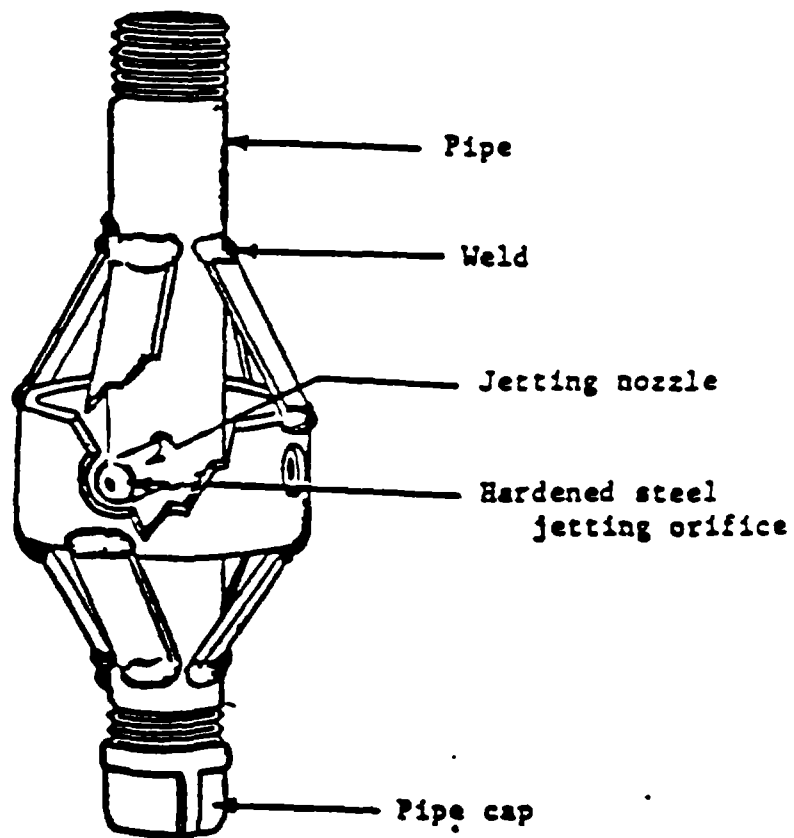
Diagram showing a simple type, four nozzle jetting tool.
